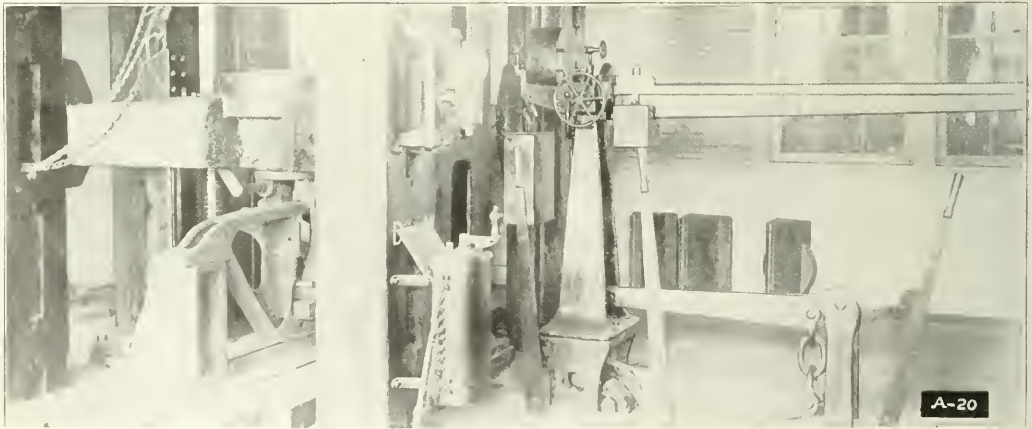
Book A, Test 16. Truck Bolster, Broken Through Weld. Breaking Load, 159,300 Lb.
